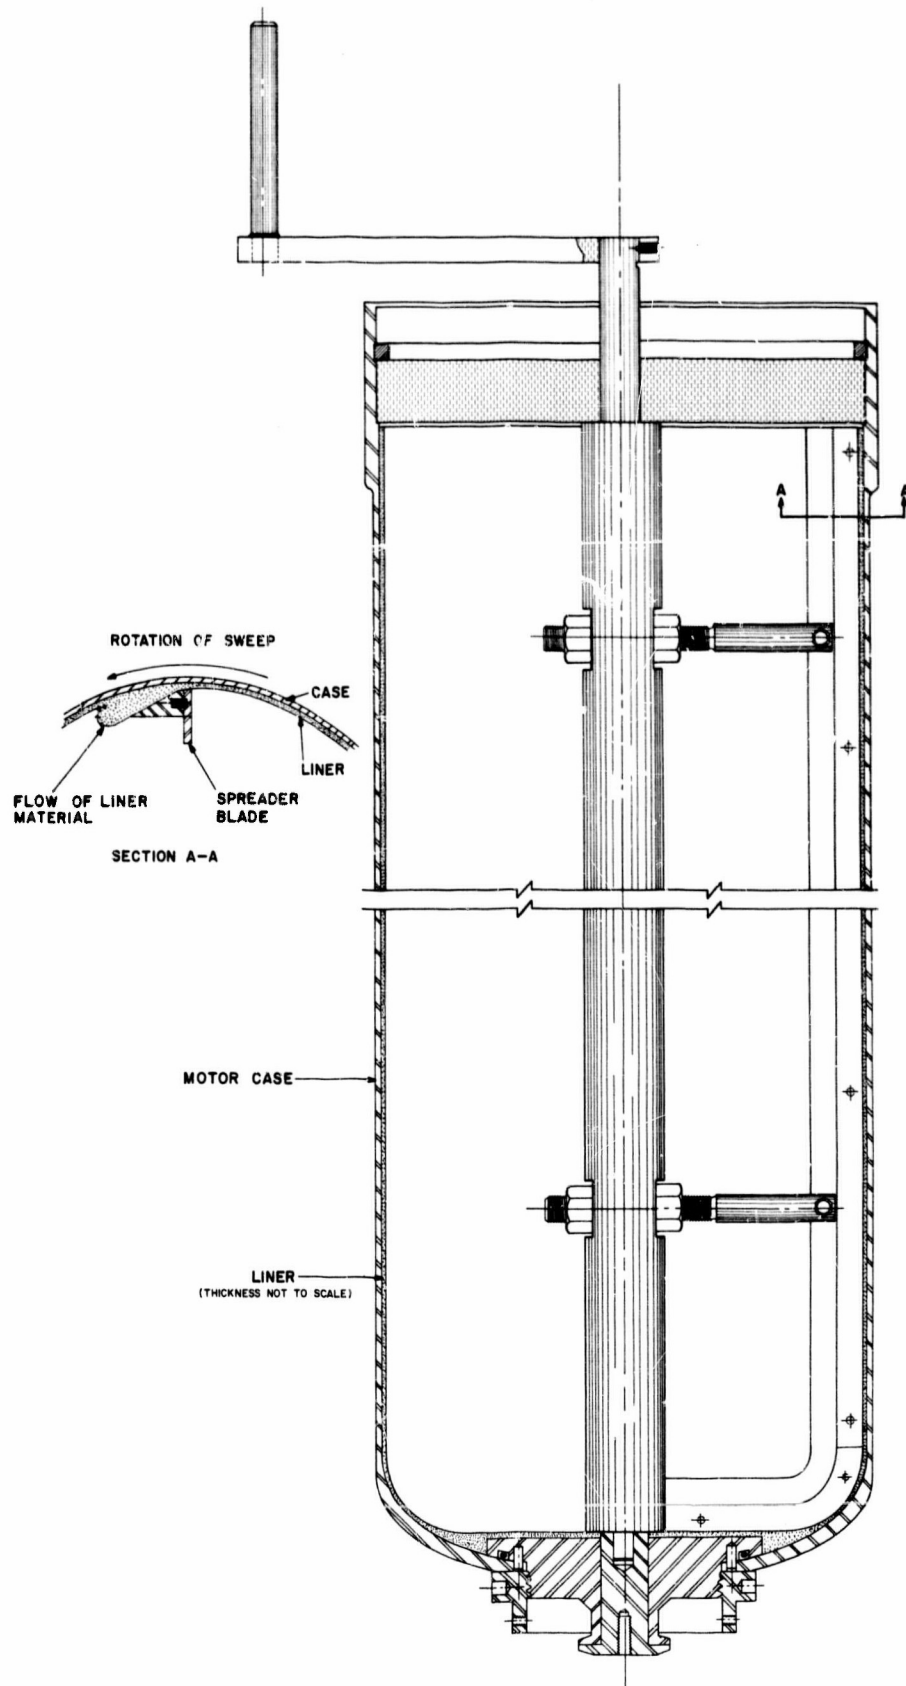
LINER SPREADER ASSEMBLY FOR 80-lbm MOTOR.
